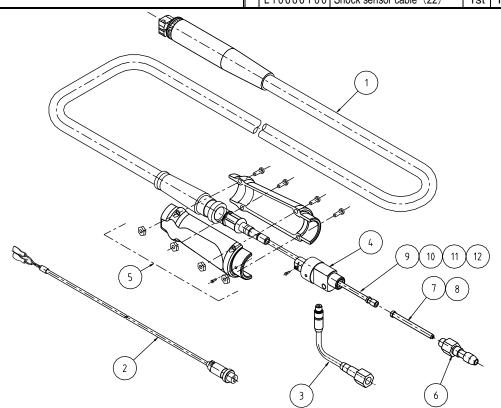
Exploded diagram for the coaxial power cable (For V type manipulator)
